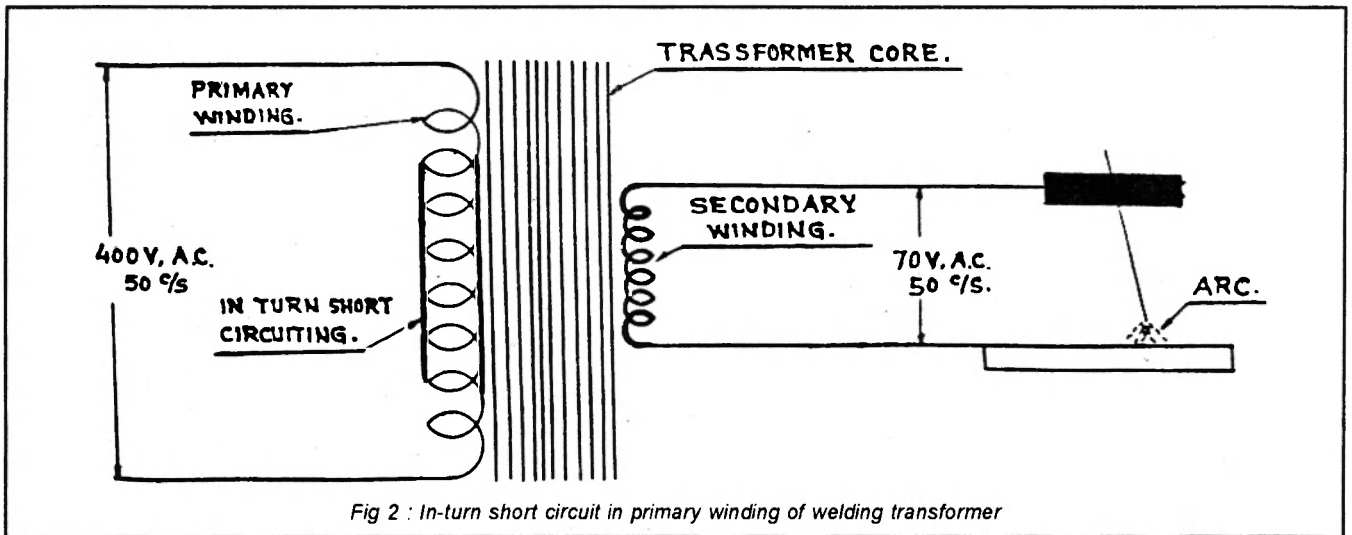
In-turn short circuit in primary winding of welding transformer
